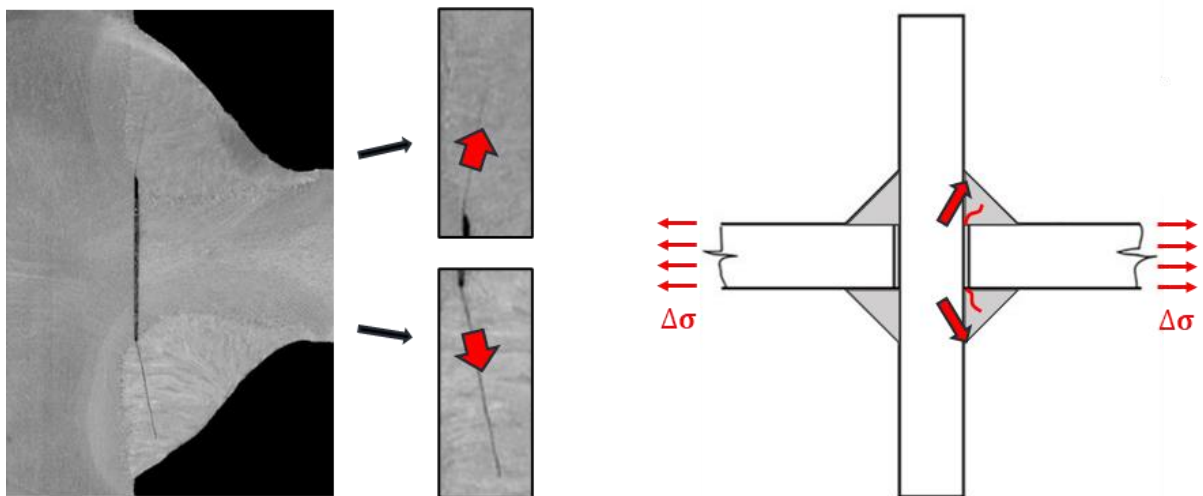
Macrographic of a C-joint with weld root failure and a sketch of the case, from [Brau20a]
